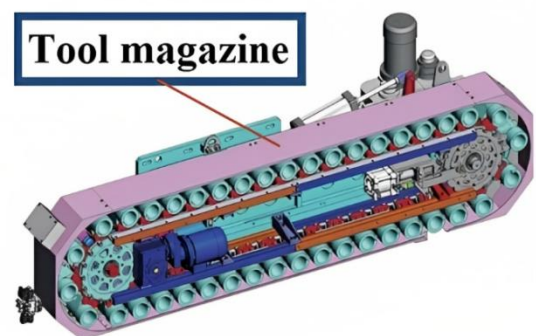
Structure of an automatic tool changer of computer numerical control machine tools [91]
